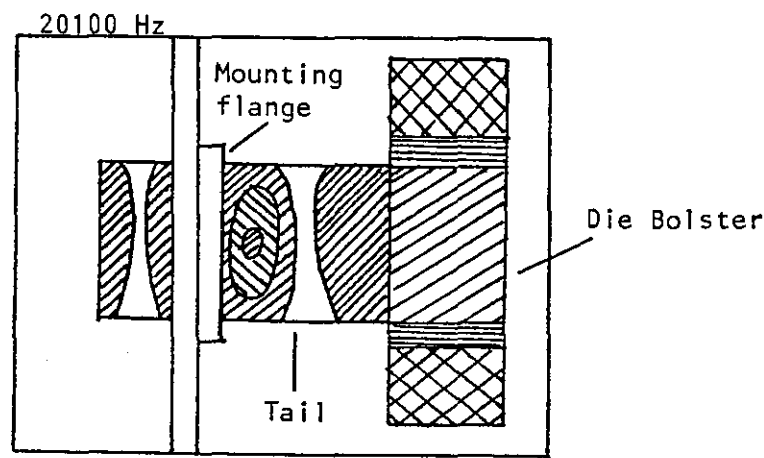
Side View of Die and Mounting Tail Showing ESPI Fringe Pattern
